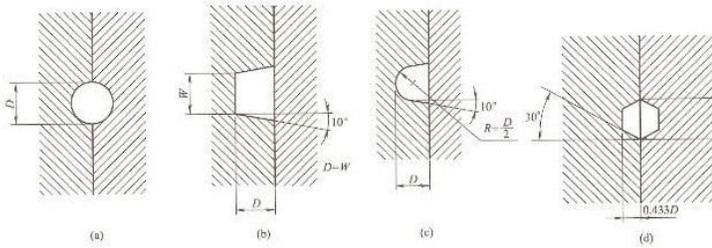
Runner profiles (a)fully round (b)trapezoidal (c)modified trapezoidal (d) hexagon
